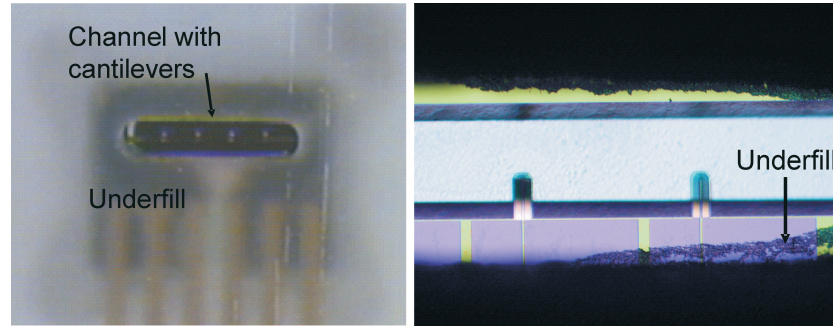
Flip chip bonding using the Si Cation chip. The chip is seen through the backside of the PCB. Left: The underfill covered the area between the chip and the PCB but did not spread into the channel where the cantilevers were placed. The bright stripe parallel to the conductors was a sign that the underfill had not filled the entire area under the chip. Right: To avoid damage of the cantilevers, the channel in the PCB was made slightly larger than the channel in the chip, so that the underfill would stop before it reached the cantilevers.
